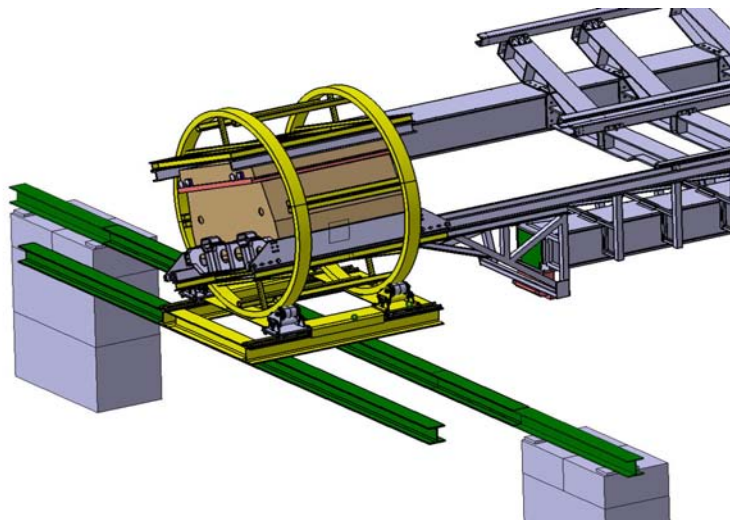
A PHOS module is positioned in the installation tool mounted on a low chariot. A custom bridge piece connects the extruded aluminum rails on the A-Side cradle to corresponding rail pieces on the installation tool.
